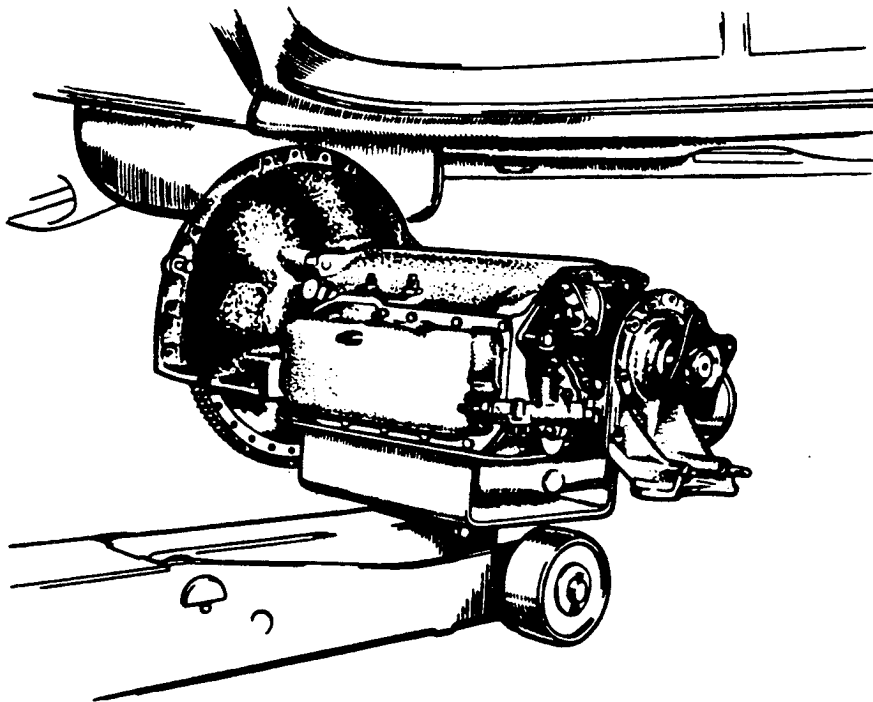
REMOVING GEARBOX FROM UNDERNEATH SIDE OF CAR.
